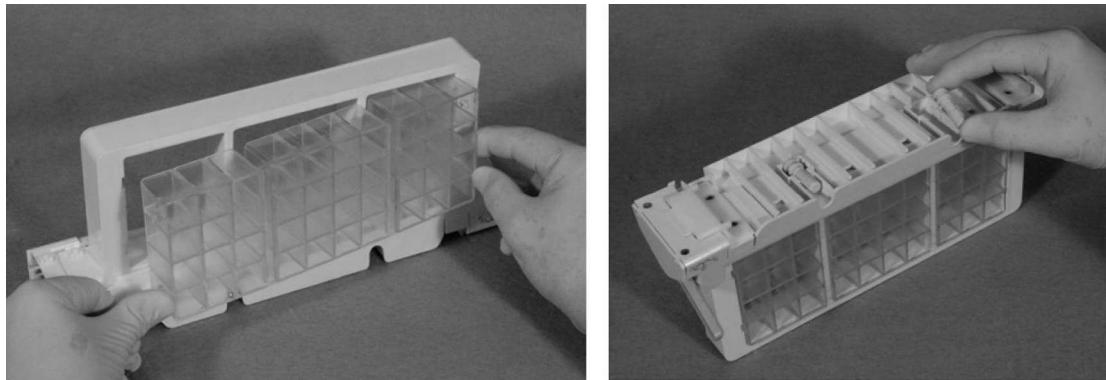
Left: Inserting the medial grid plate. Right: Attaching 2 sealed fiducial assemblies to the bottom of the medial biopsy frame.
